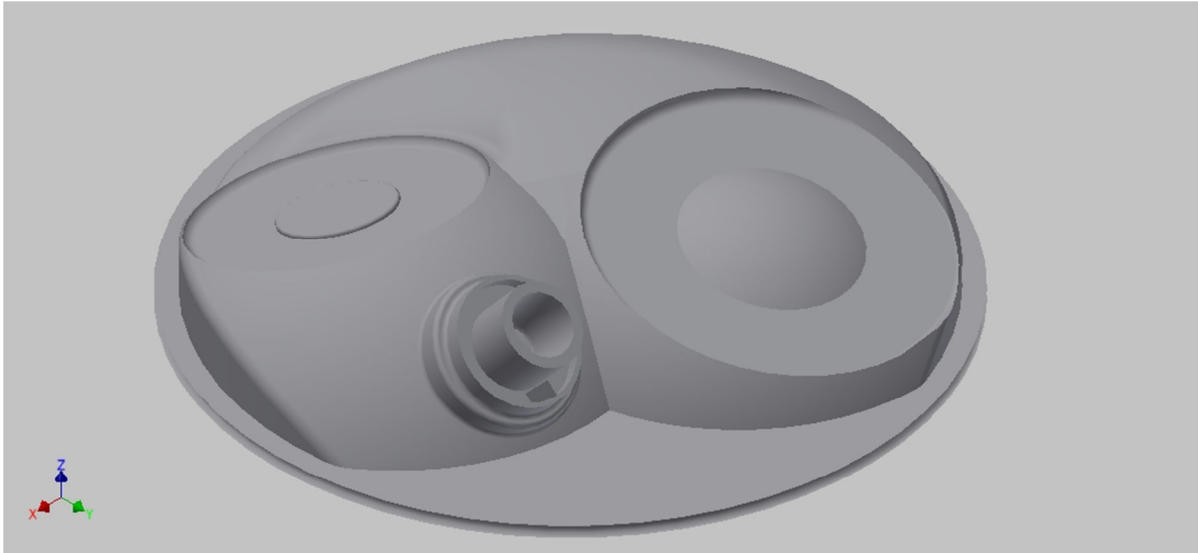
Combustion chamber of Peugeot TU3JP-KFW engine at TDC. This combustion chamber has one intake valve, one exhaust valve and one spark plug.
